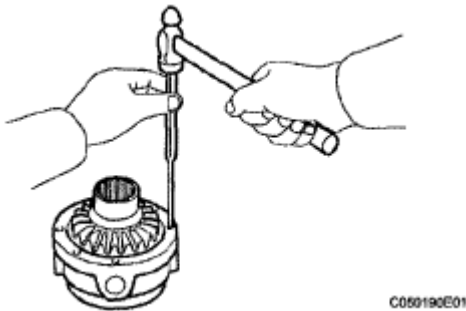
Identifying Front Differential Side Gear And Front/Center Differential Side Gear Thrust Washer
